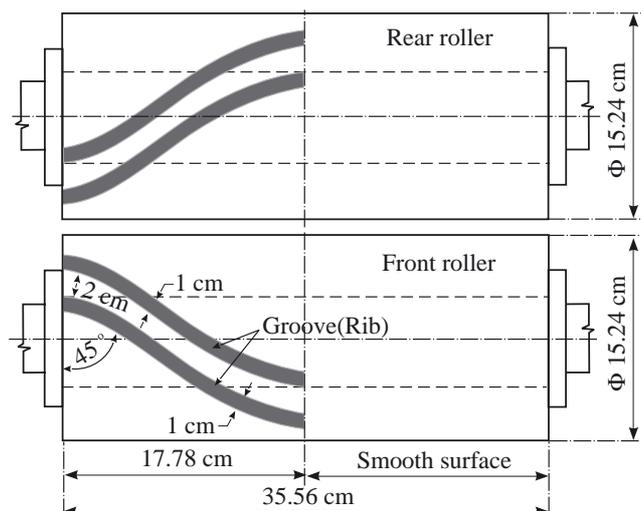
Scheme of open cracker-cum two-roll mixing mill
